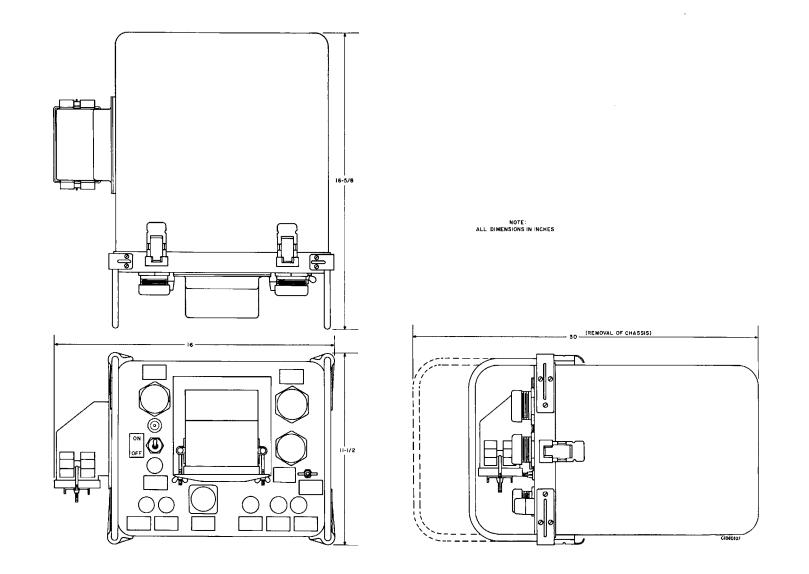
Power Supply PP-2166/TPS-25, Dimensional Drawing.
